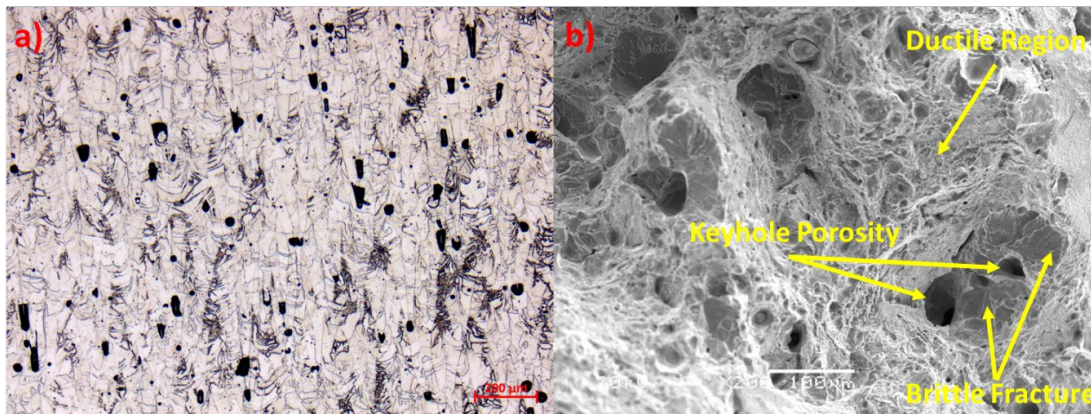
a) Etched side view micrograph and b) fracture surface after tensile test of the specimen fabricated with S8.
